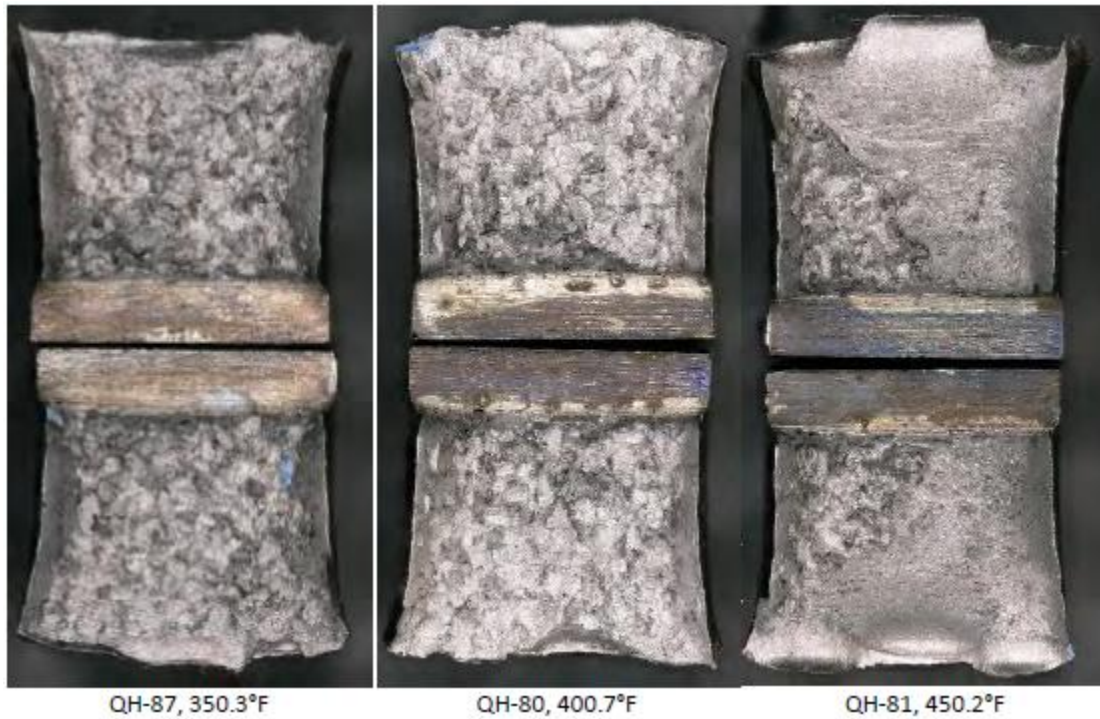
Photographs of Charpy Impact Specimen Fracture Surfaces, Base Metal Plate, Heat-Affected-Zone
